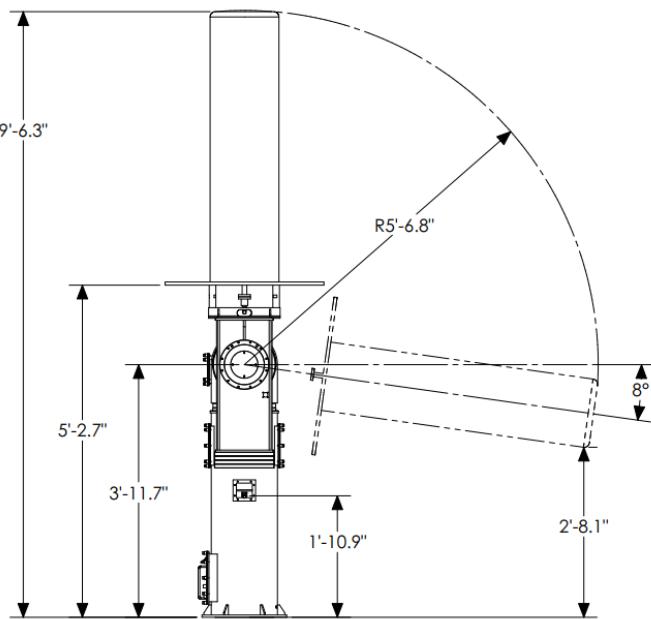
Model 1800-FTS Single Helix Dimensional Drawing
